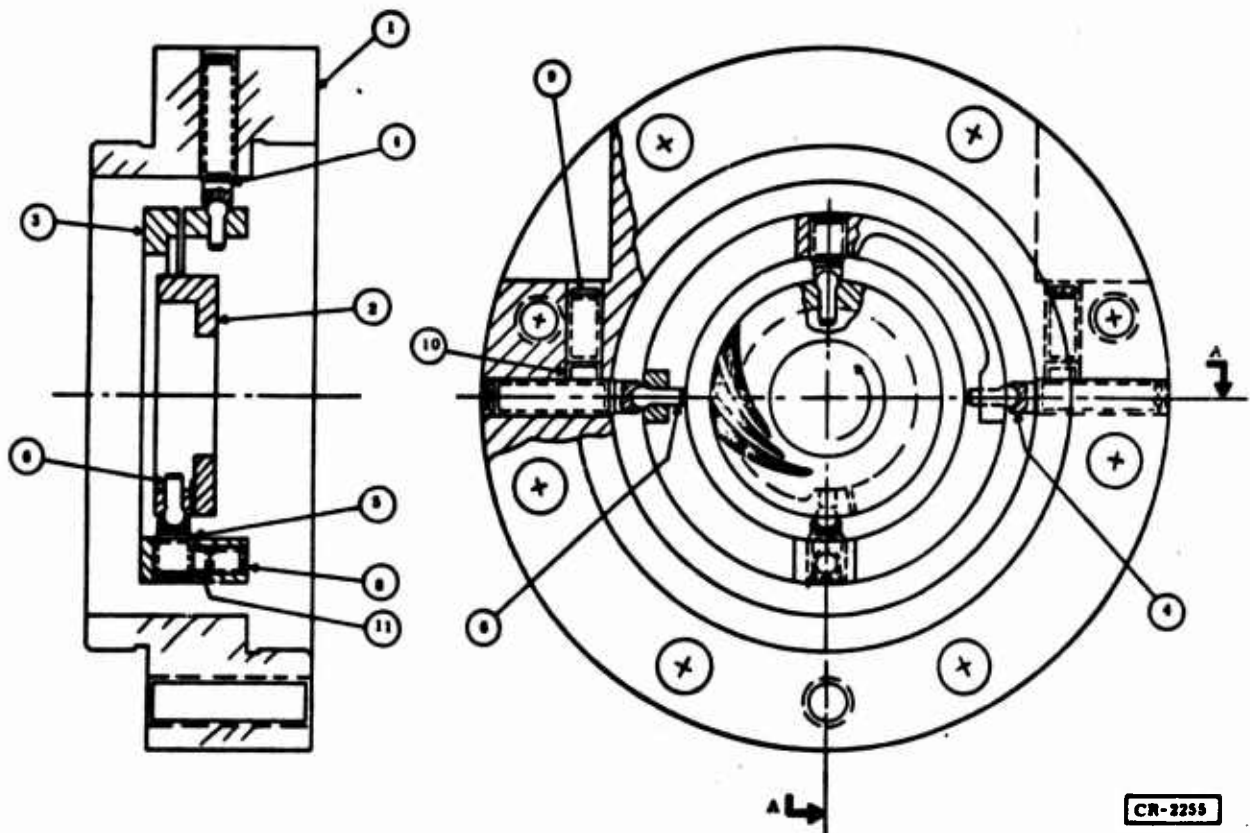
Two-Stage Turboalternator Inner Thrust Bearing Assembly
